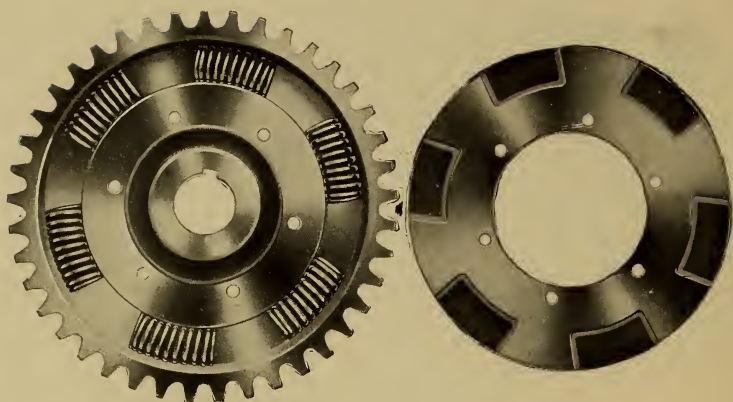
THE WESTINGHOUSE-MORSE SPRING CHAIN WHEEL
